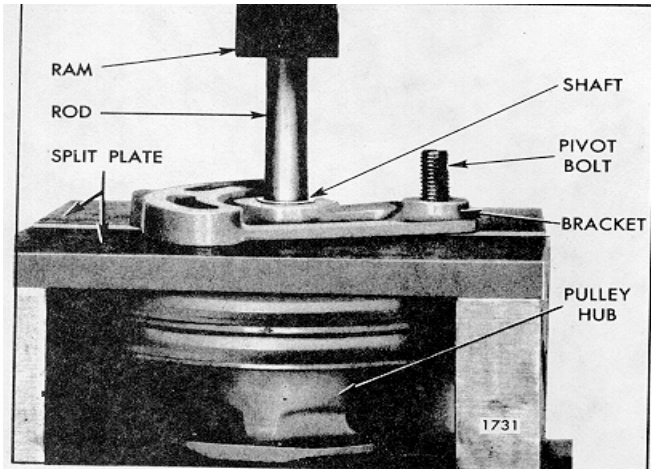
Removing Fan Shaft from Fan Adjusting Bracket
